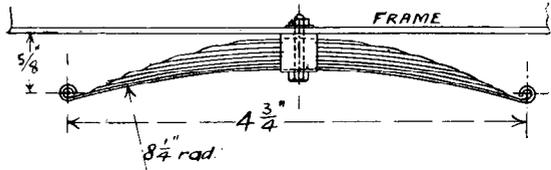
FIG. S.—TRANSVERSE SPRING. (Half full size.)
